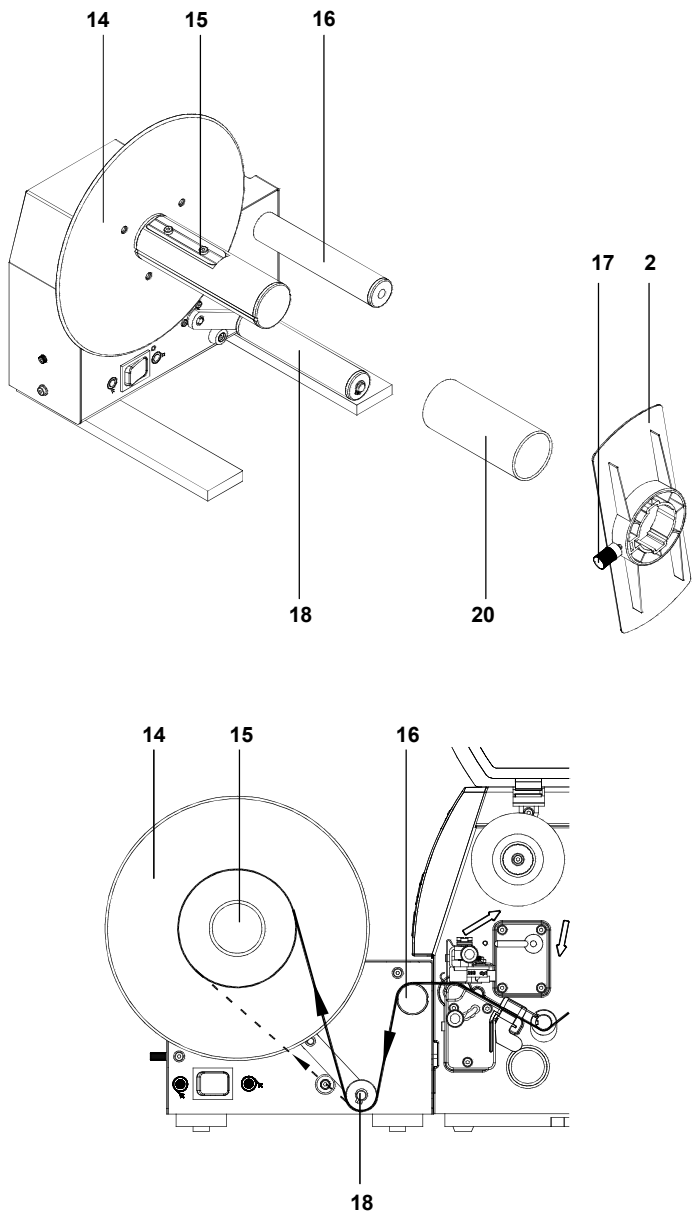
Rewinding onto 3 in (76 mm) cardboard core
